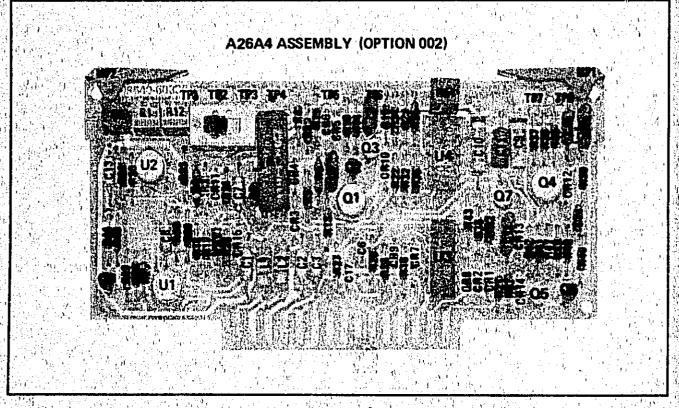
A26A4 AGC Amplifier Assembly Component Locations (Option 002)
